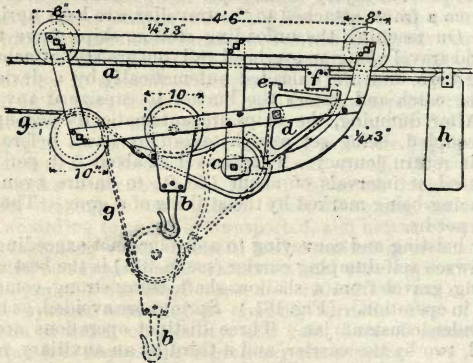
DAWSON SELF-DUMPING CARRIER.
